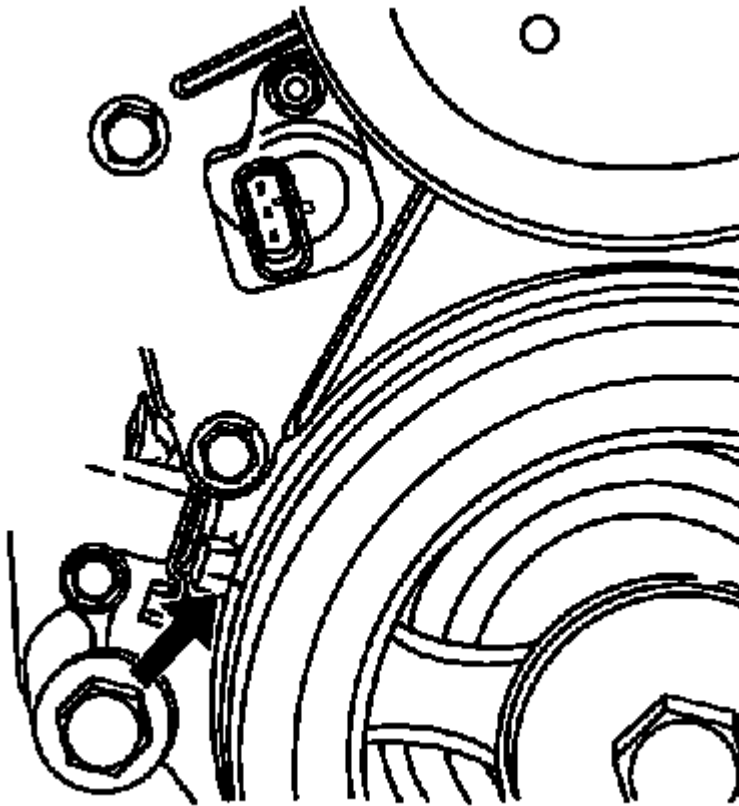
View Of Crankshaft Balancer Mark Aligned With Engine Mark
